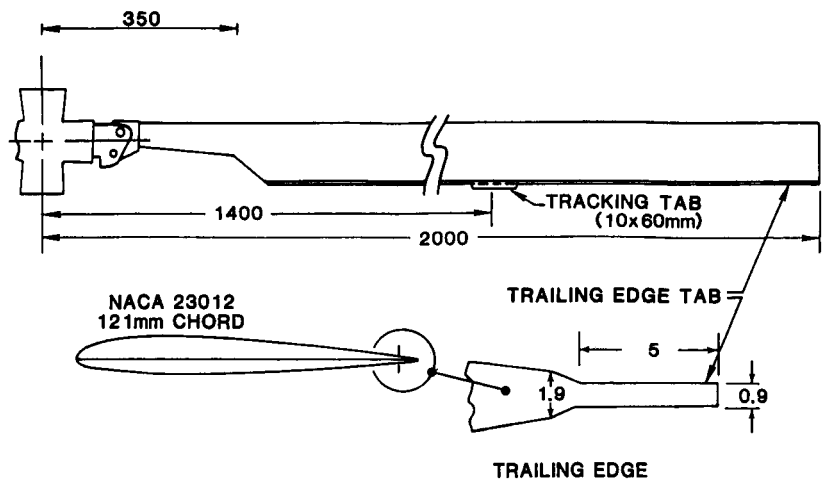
Model BO-105 rotor blade geometry. Dimensions are in millimeters.
